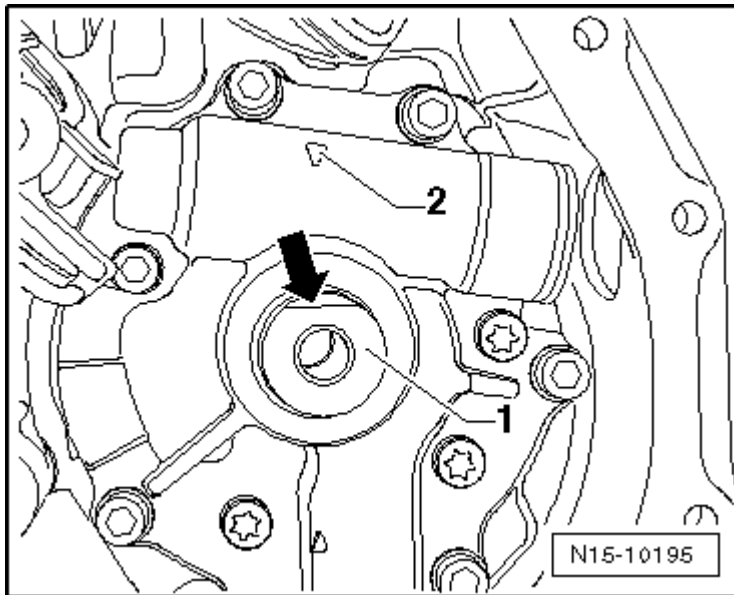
Setting Oil Pump Shaft With Flat Side Horizontal To Marking On Oil Pump
